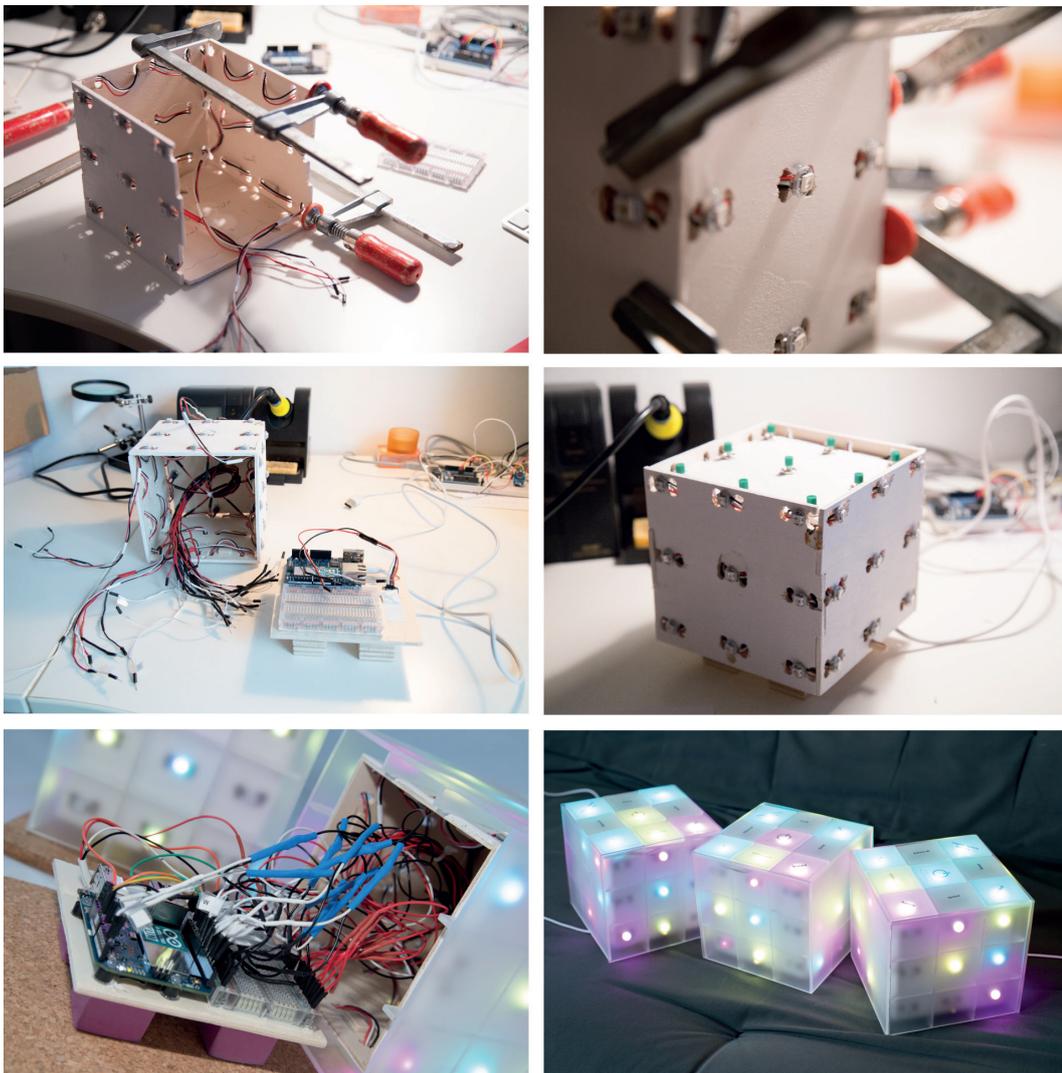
Awareness cube* construction; a: assembly of wooden sidewalls; b: LEDs mounted on the sidewalls; c: inner cube and bottom plate with microcontroller and breadboard; d: finished inner cube; e: opened cube with transparent Plexiglas shell; f: three completely finished and illuminated *awareness cubes*.
